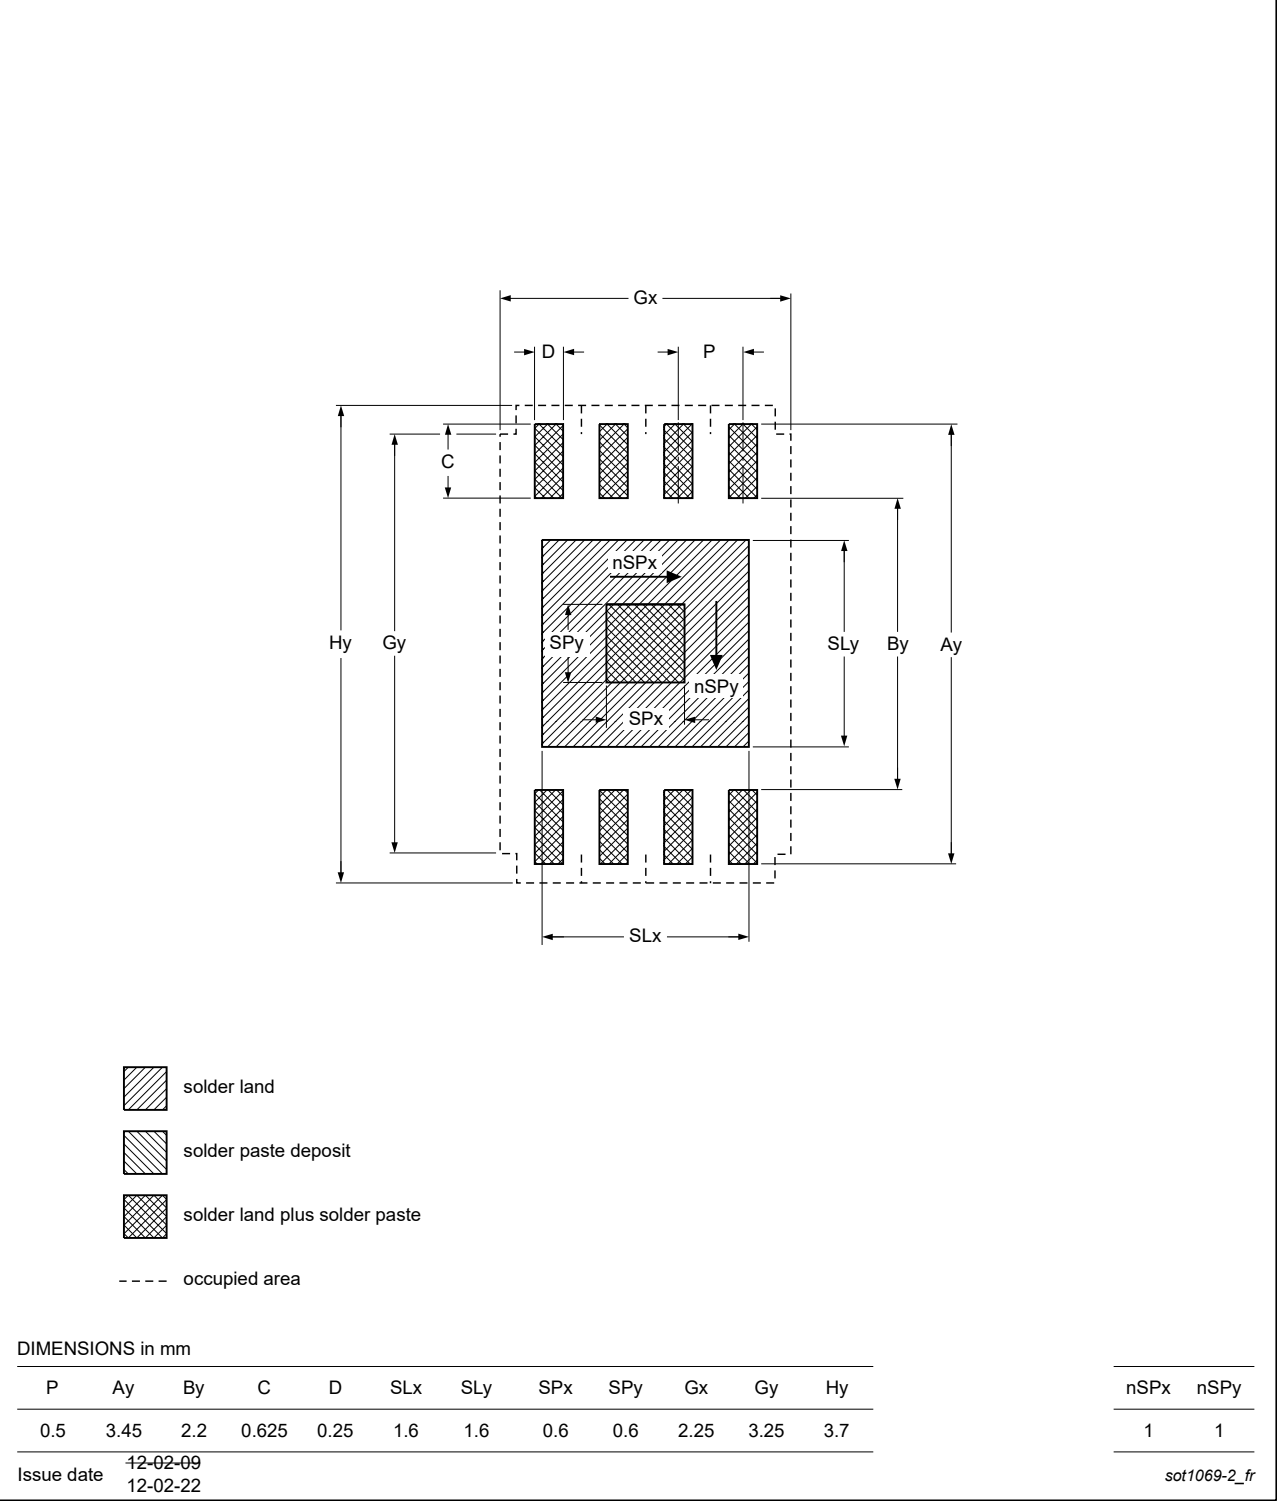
PCB footprint for SOT1069-2 (HWSO8); reflow soldering
